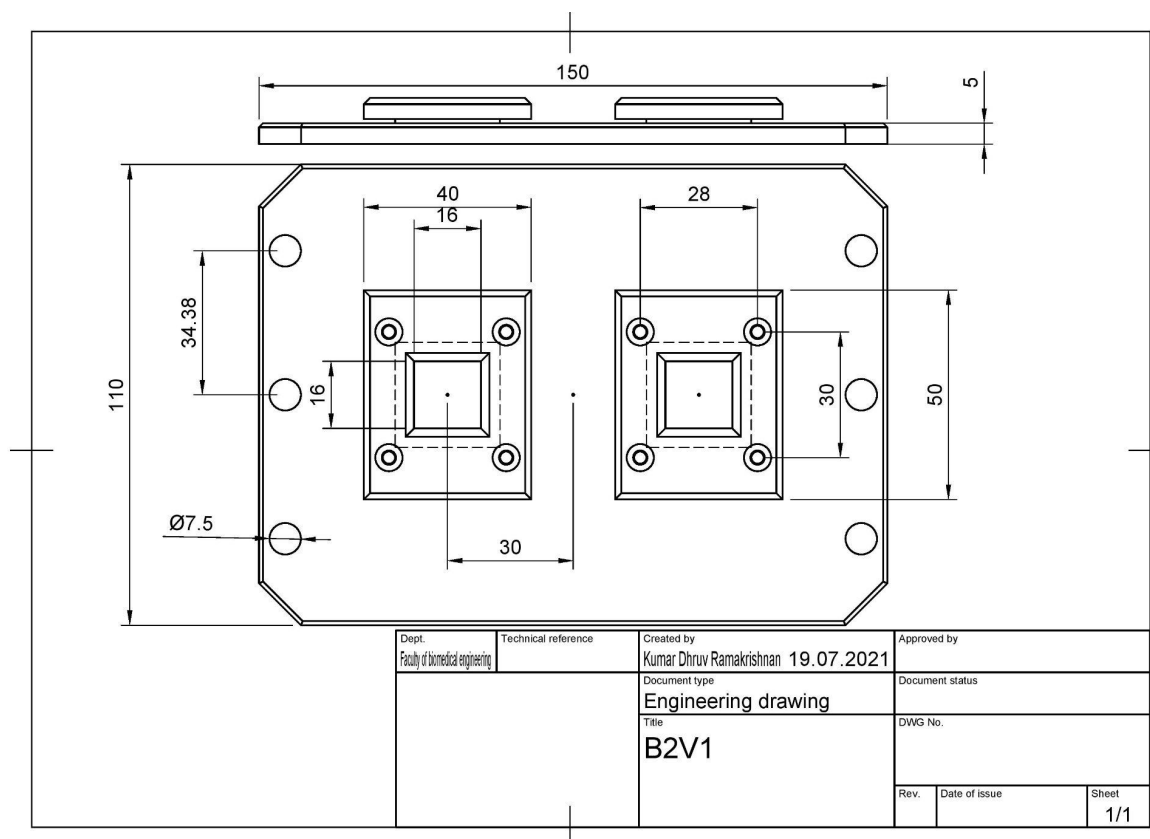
Fixture Design 2 Version 1 (B2V1)
